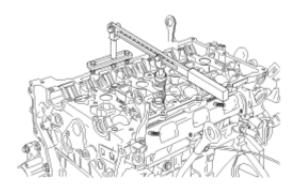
Compressing Spring And Retainer Locks Courtesy of HYUNDAI MOTOR CO.
